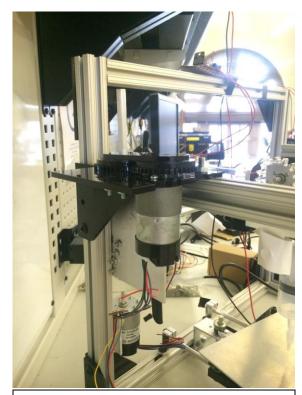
Initial prototype of wire feeder system with gearmotor mounted underneath
